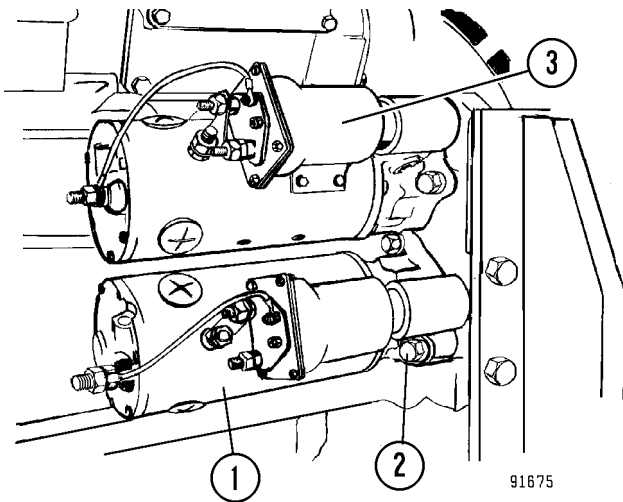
TYPICAL STARTER INSTALLATION
